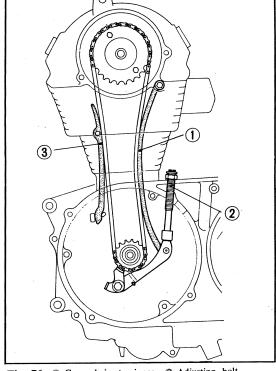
① Cam chain tensioner ② Adjusting bolt ③ Cam chain guide
